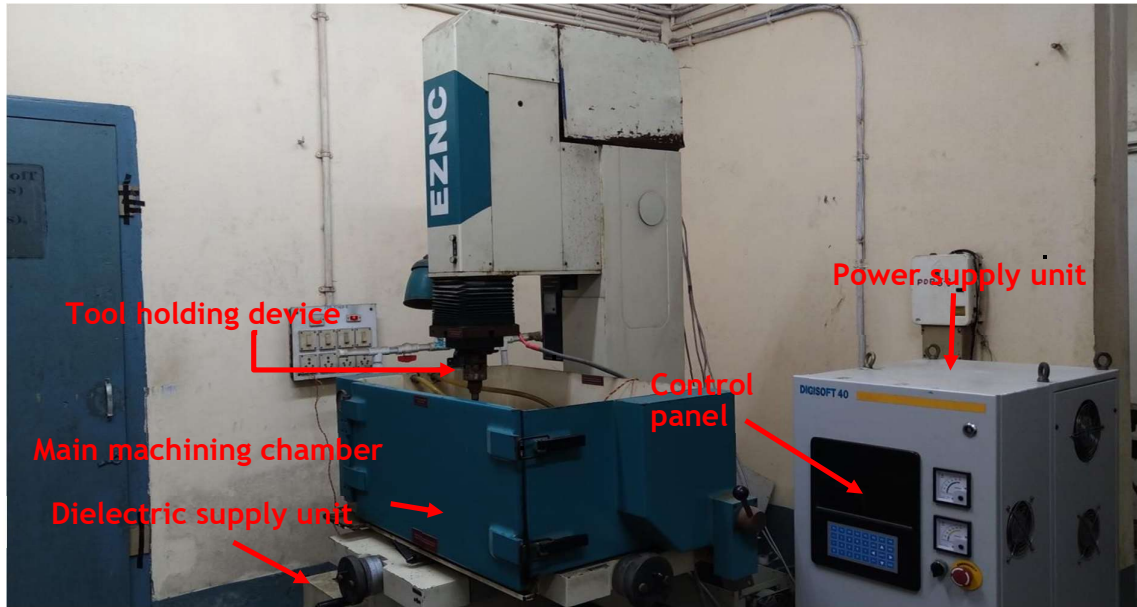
Photographic view of S-35 ZNC Die-Sinking EDM Machine
